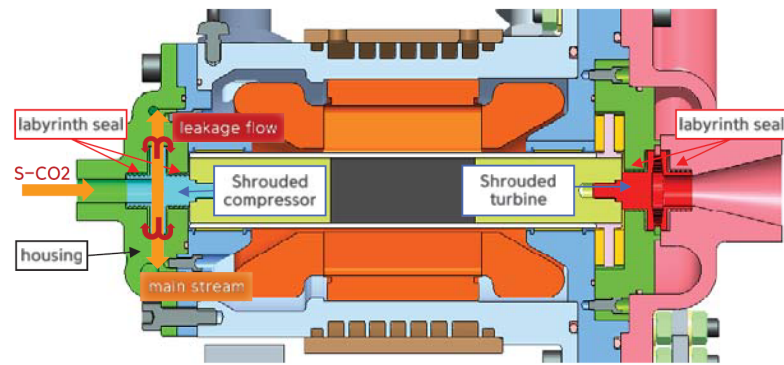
Usage of a shrouded turbine with labyrinth seals to balance axial loads [65].
